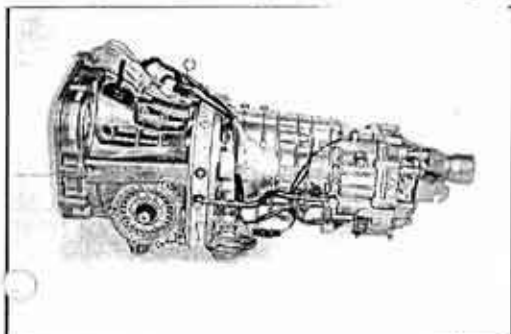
Gearbox casing and clutch bell housing 2
